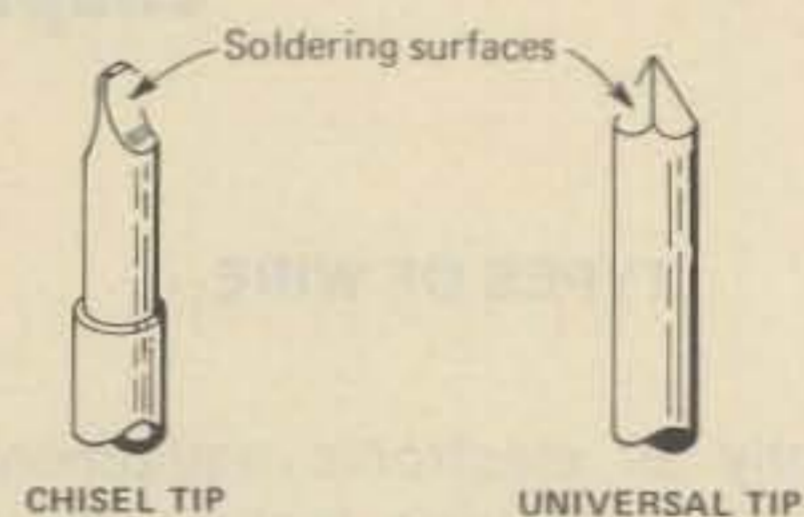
Two shapes of tips most commonly used for soldering irons.
